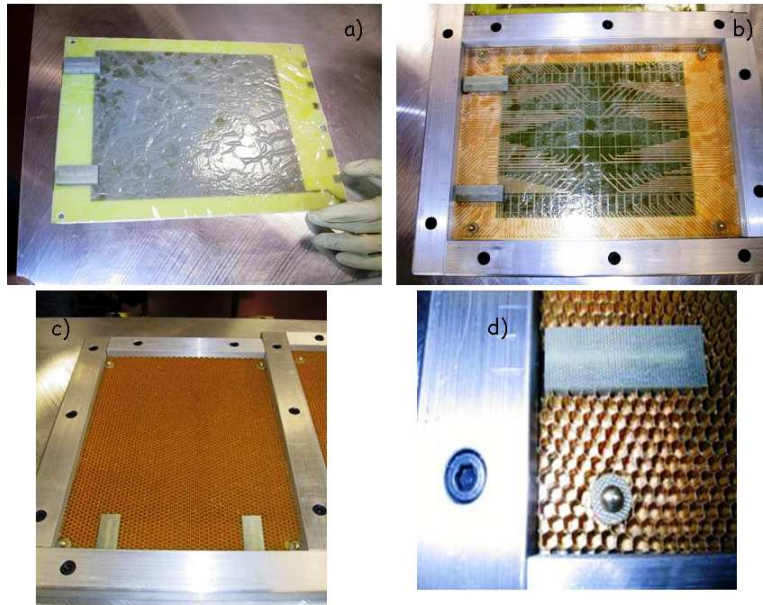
Panel production steps: (a) the cathode and (b) the readout PCB are coupled with gas inserts and four bushings. Then a thin 3M epoxy film is applied; c) the honeycombs foil, cut to size, is placed above followed by the back-plane; d) close view of the gas insert and the bushing.
